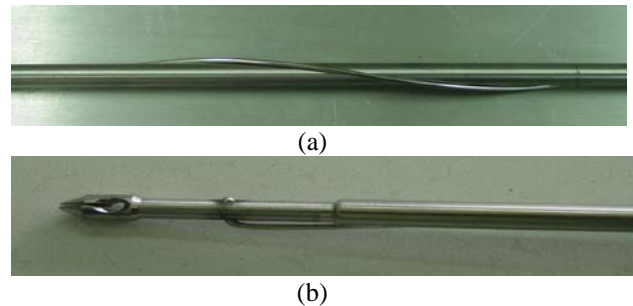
Wire wrapped pitch (a) and spot welded wire (b) after wire wrapping.
